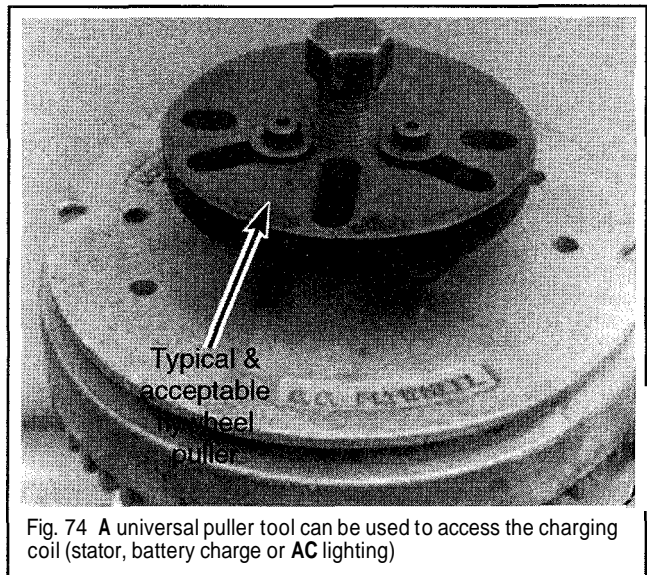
A universal puller tool can be used to access the charging coil (stator, battery charge or AC lighting)
